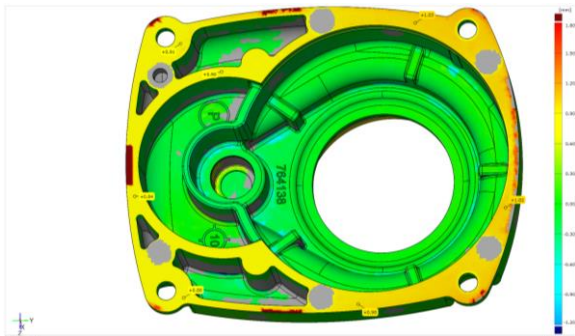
Mutual alignment of the reference CAD prototype and the digitized STL model of the upper half of the mixer gearbox (rough casting) [GOM GmgH]
